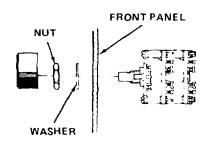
Radio Transmitter Front Panel and Chassis-Mounted Parts Location Diagram (Sheet 2 of 3)
